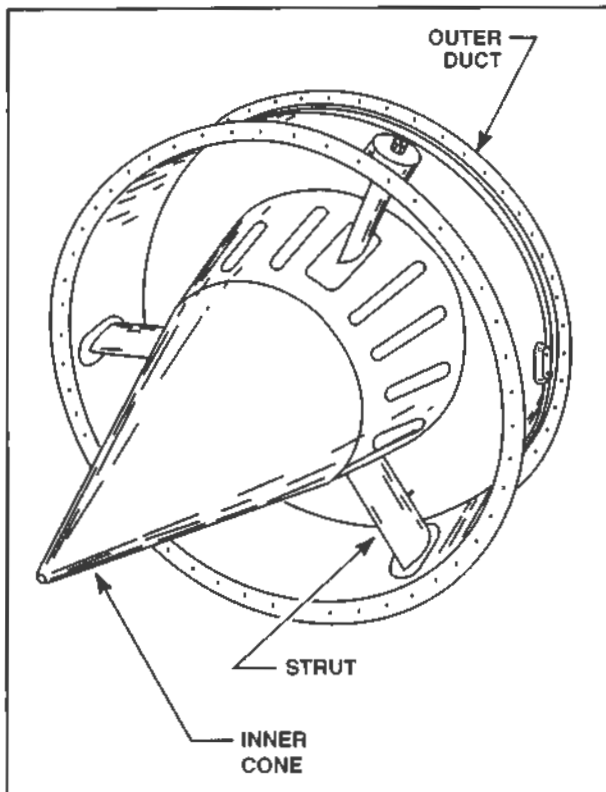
The exhaust cone is the rearmost engine component. It straightens and smooths exhaust gas to extract the greatest possible thrust.
